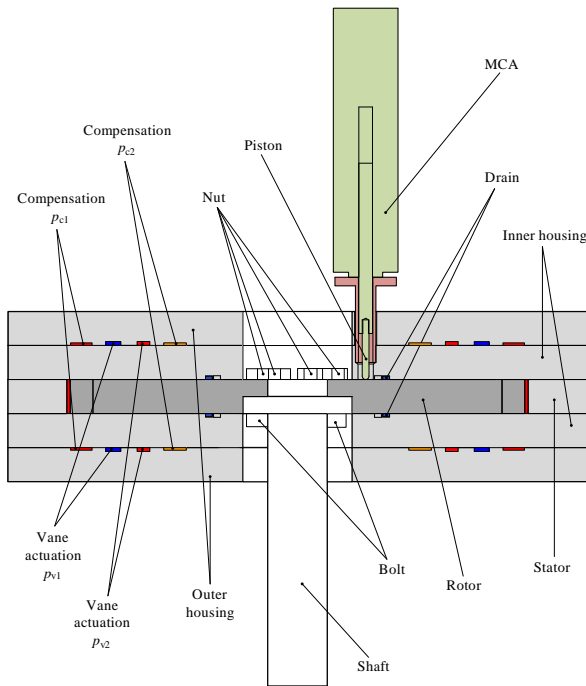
Section cut of the prototype motor. The moving coil actuator (MCA) is mounted on the inner housing and the piston is forced against the end face of the rotor during tests.
